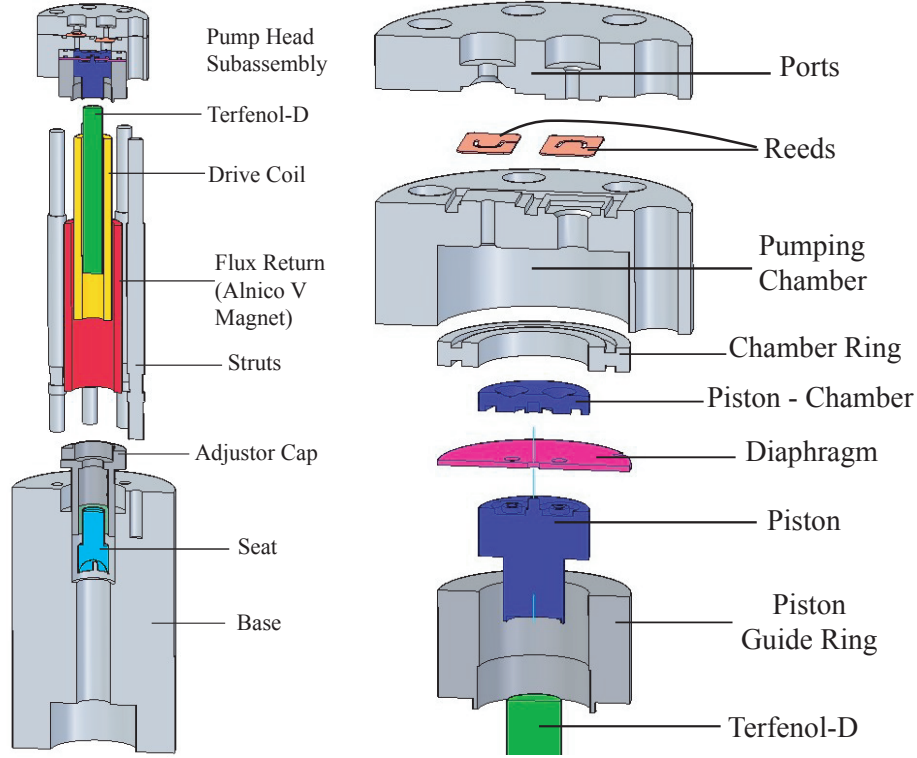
Exploded view of the pump assembly with a detailed view of the pumping chamber (Reproduced from [67]).
